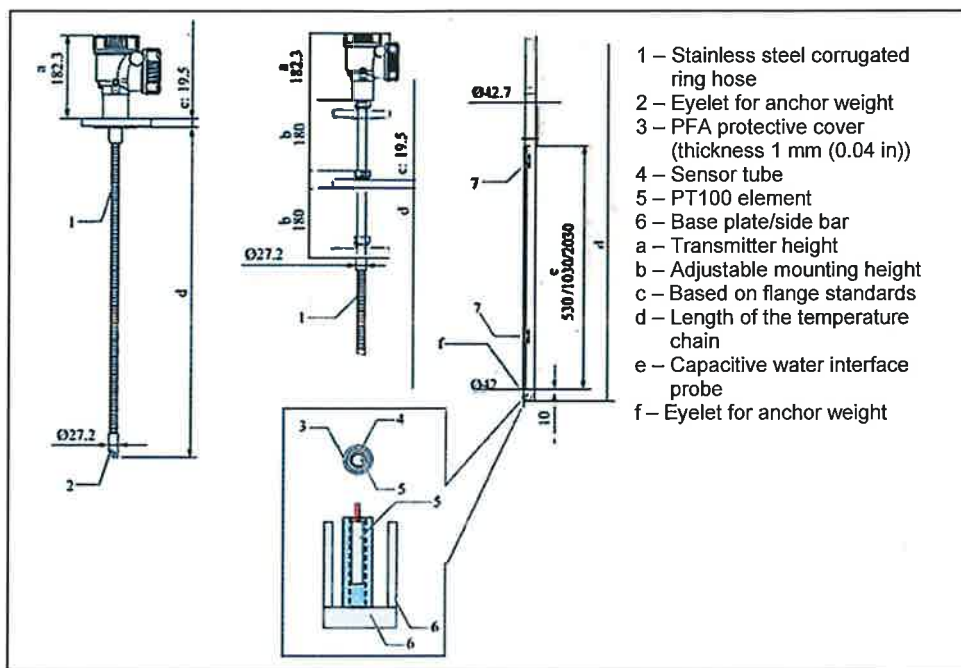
Prothermo NMT81 in various configurations (from left): with welded flange, with adjustable flange, with water layer measurement
